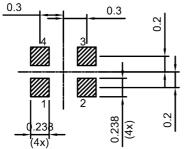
Drawing of package with package height A = 0.5 mm (max.). See Sec. Package information (p. 18).
